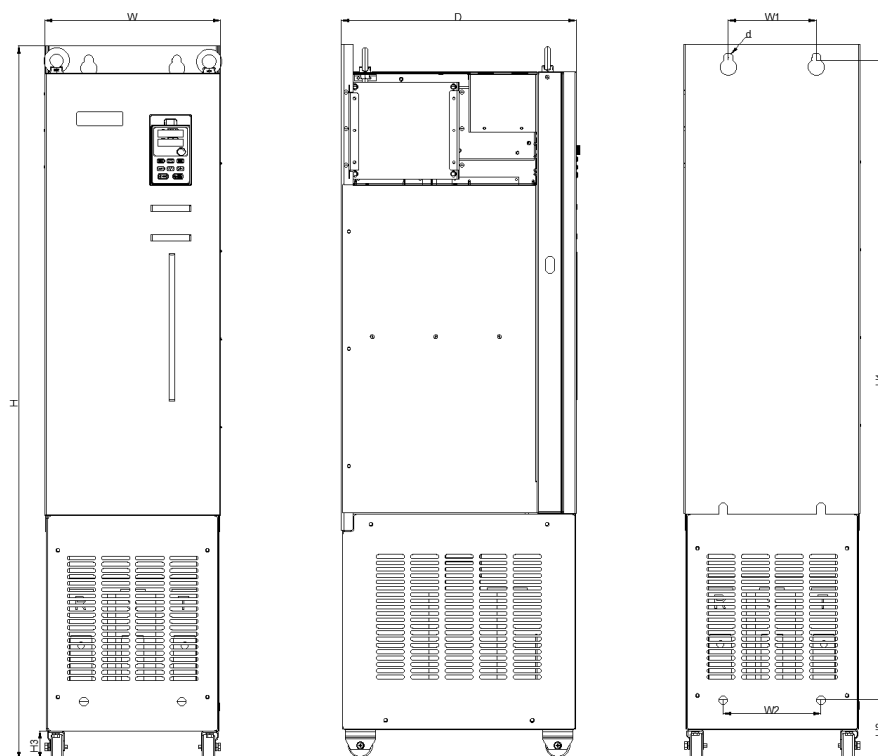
Appearance of 380V 75KW~500kW floor mounting
